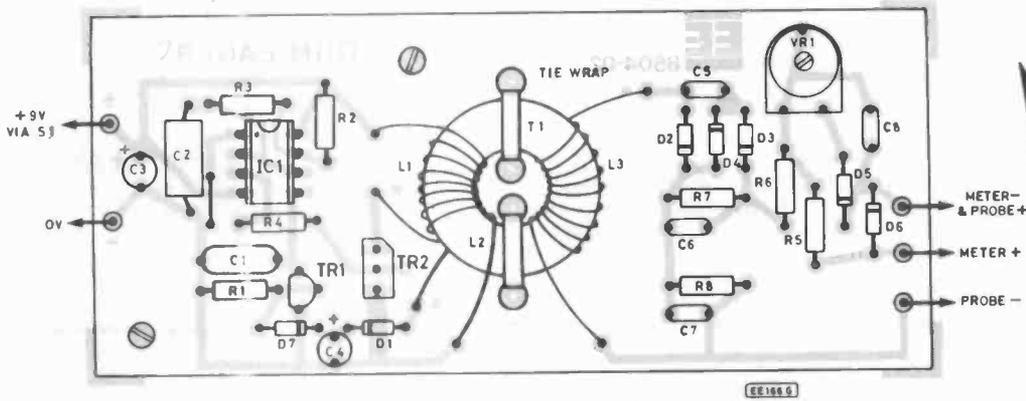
Component layout on the topside of the printed circuit board. TR2 may be a TO5 can transistor.
